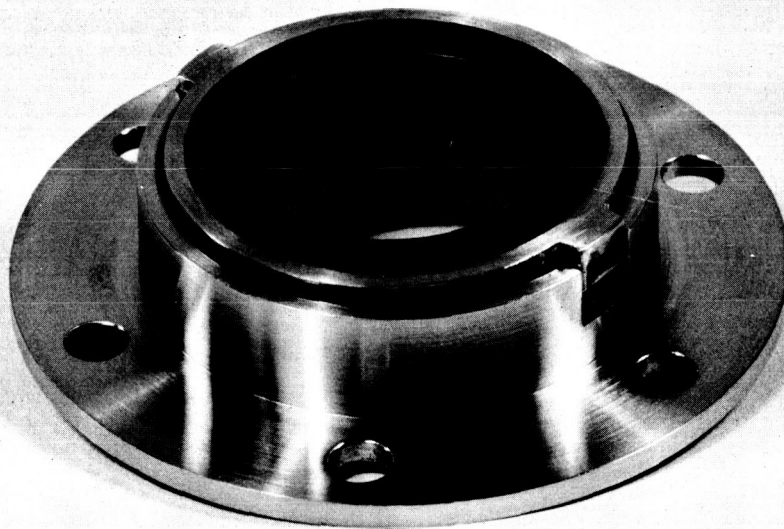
BELLOWS TYPE FACE SEAL
